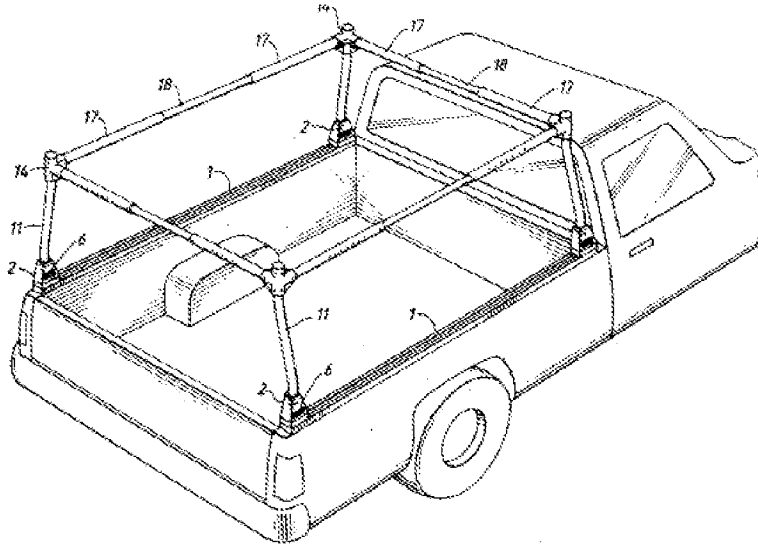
shows the rack assembly of Boudah with stanchion 11.
